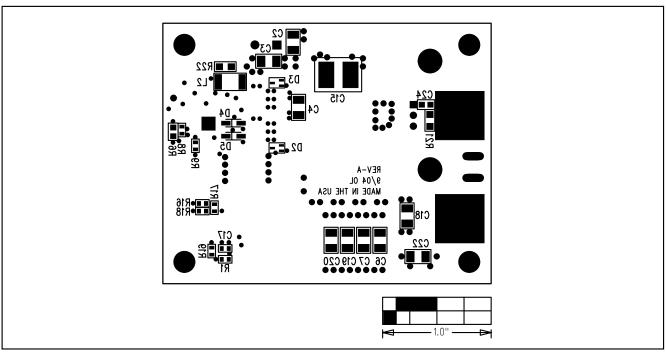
MAX5069A EV Kit Component Placement Guide—Solder Side
